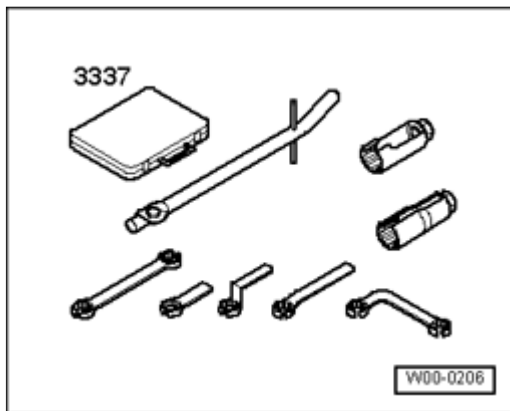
3337 Oxygen Sensor Ring Spanner
